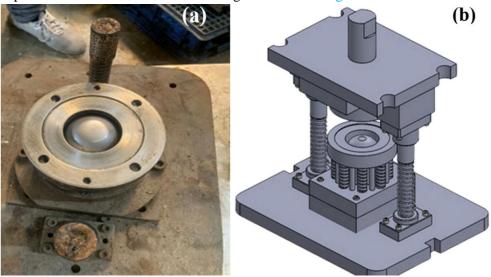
The 1-inch-deep drawing: (a) dies and punch (b) SolidWork Design.
